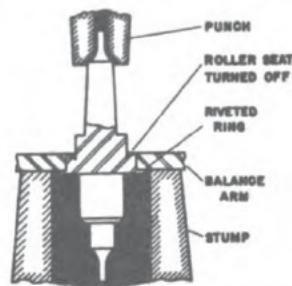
Removing the balance wheel (rivet-type staff) with staking tools.
